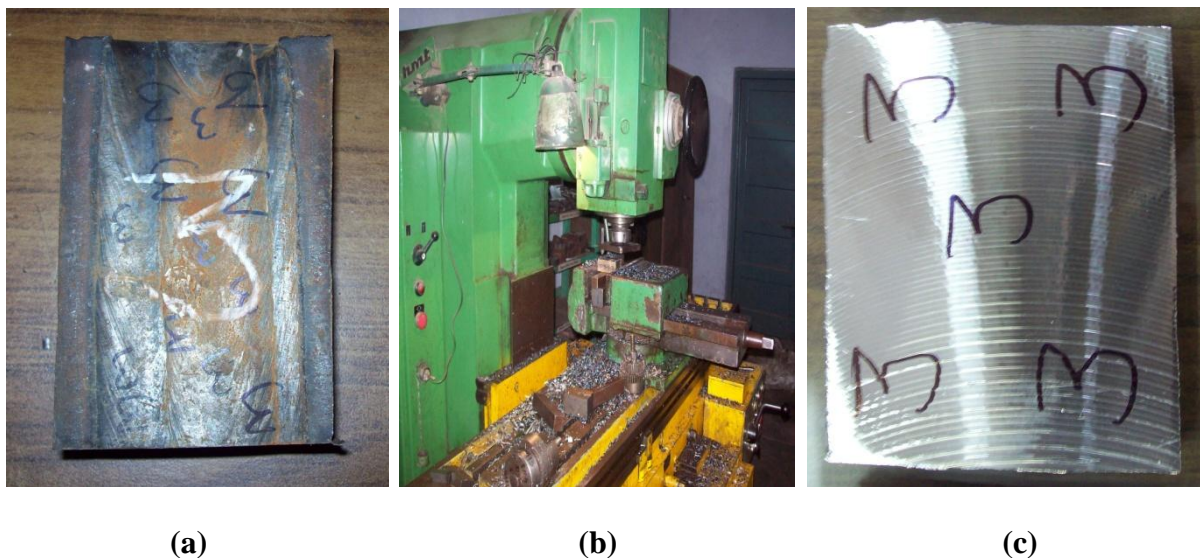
(a) Weld region with 28 mm thickness, (b) Machining on vertical milling machine (Courtesy: Central Workshop, Thapar University, Patiala), (c) Weld region with 10 mm thickness
